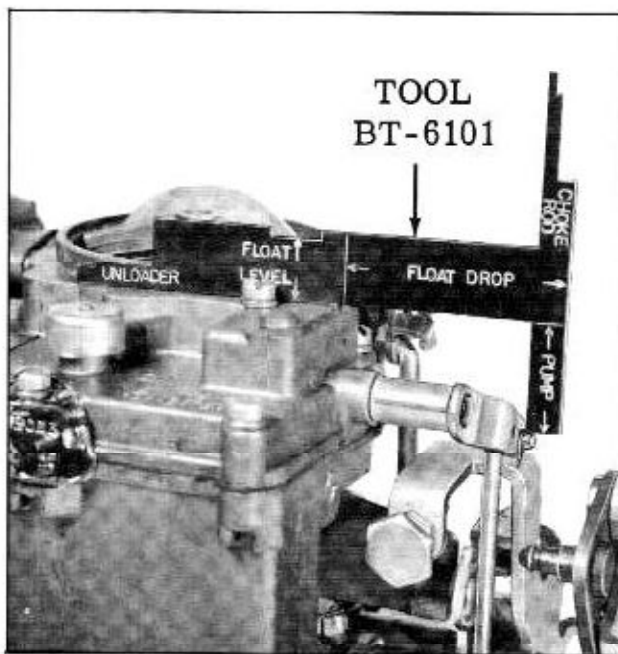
Pump Rod Adjustment (Hydra-Matic)
